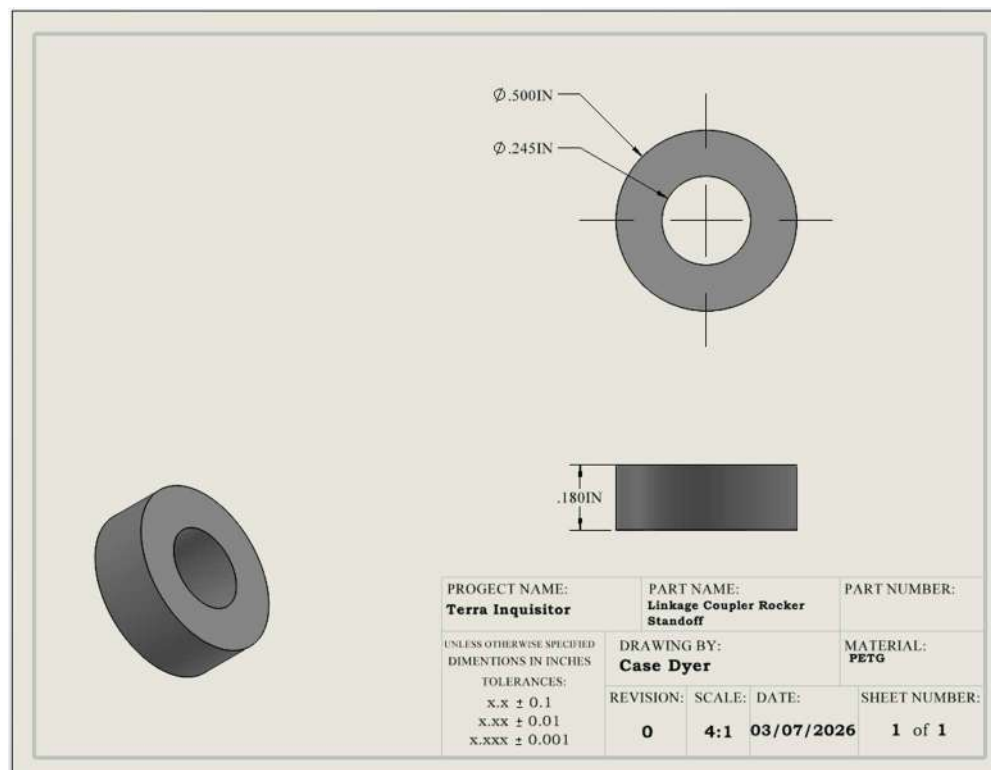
Coupler to Rocker Standoff Detailed Drawing
